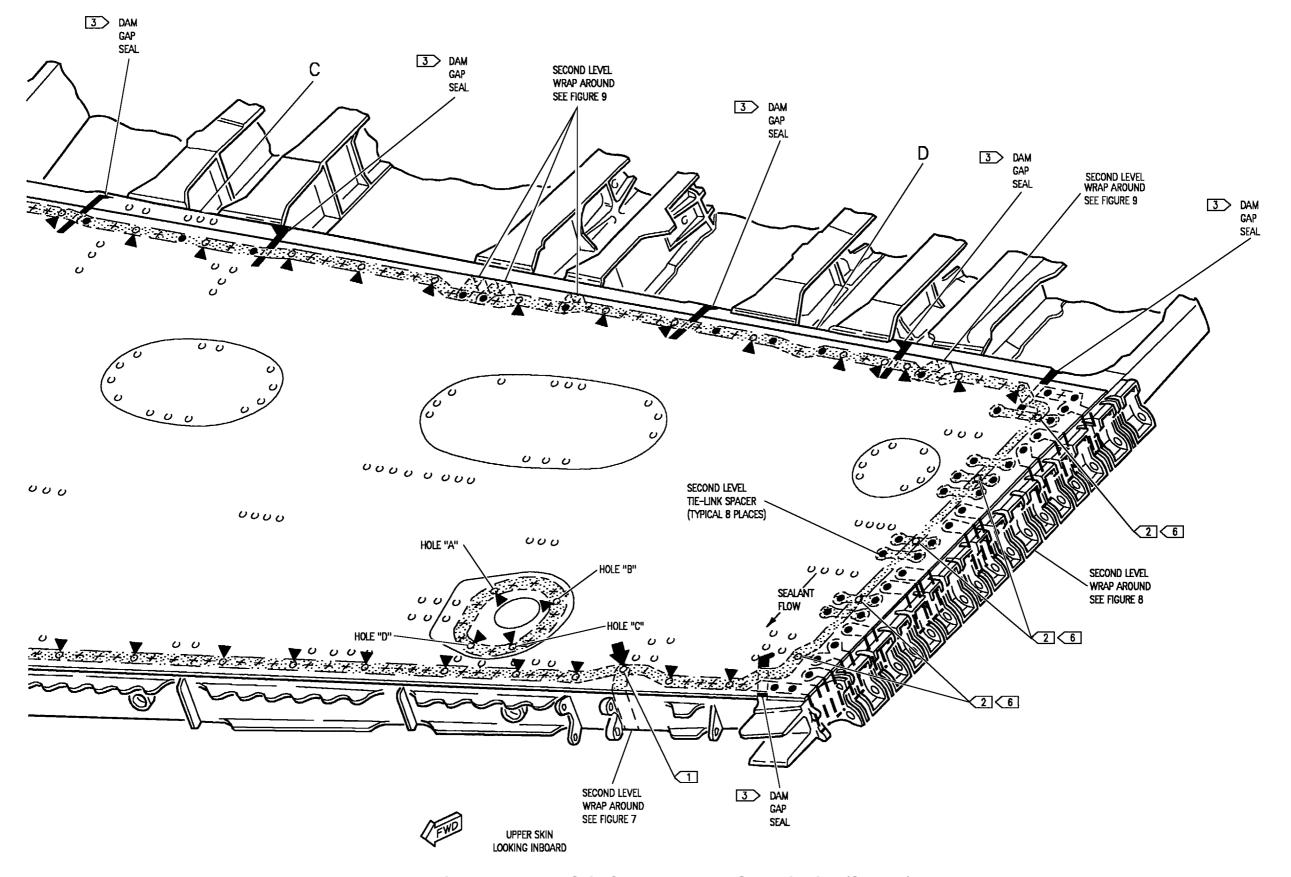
Upper Skin Channel Groove Seal Injection (Sheet 2)
